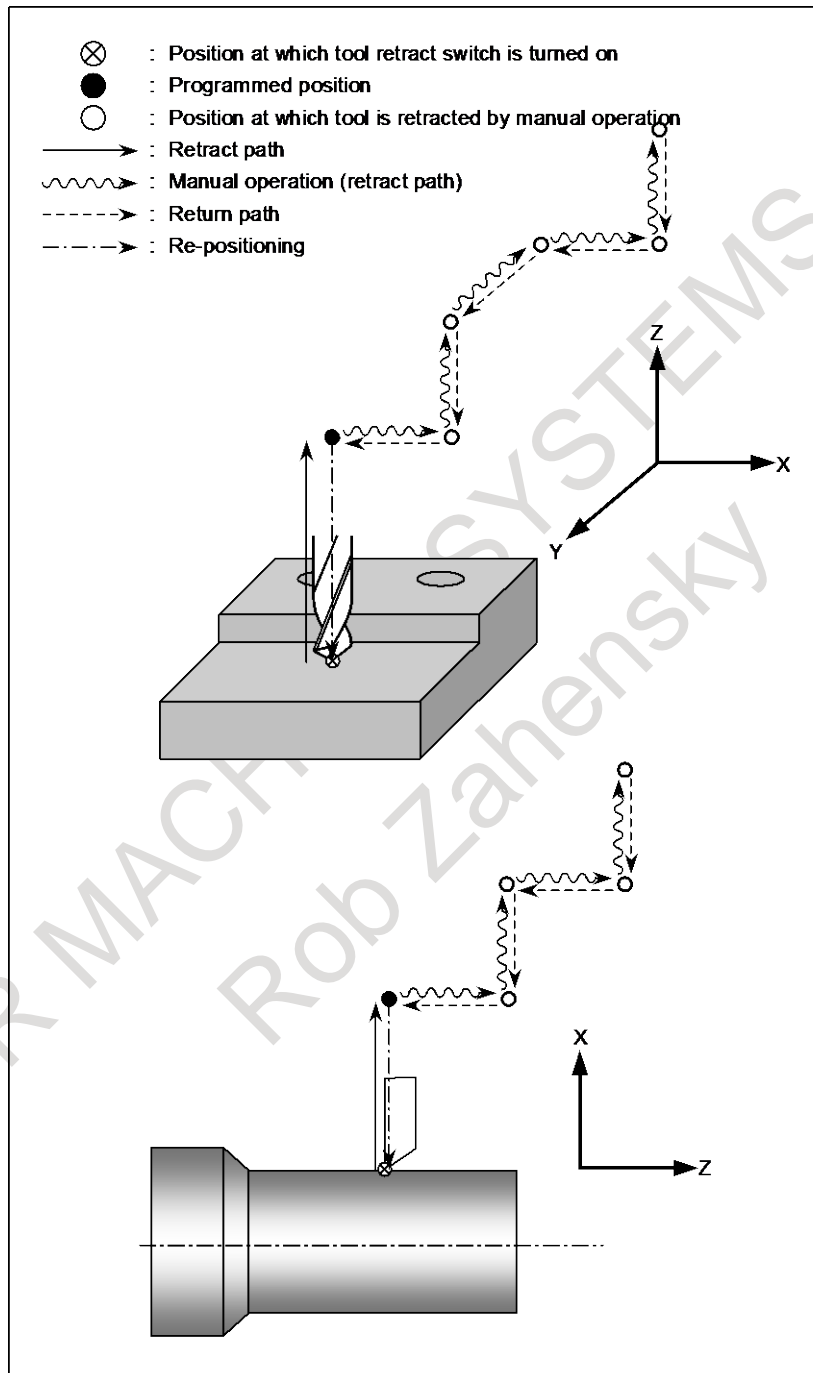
(a) Path of tool retract and recover for milling machining
